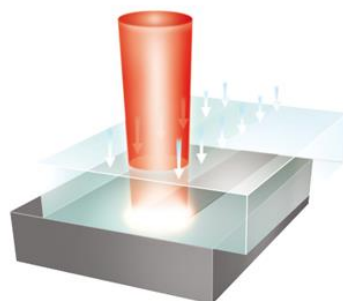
Laser plastic welding principle: Two parts are welded together using a laser beam and slight contact pressure.
